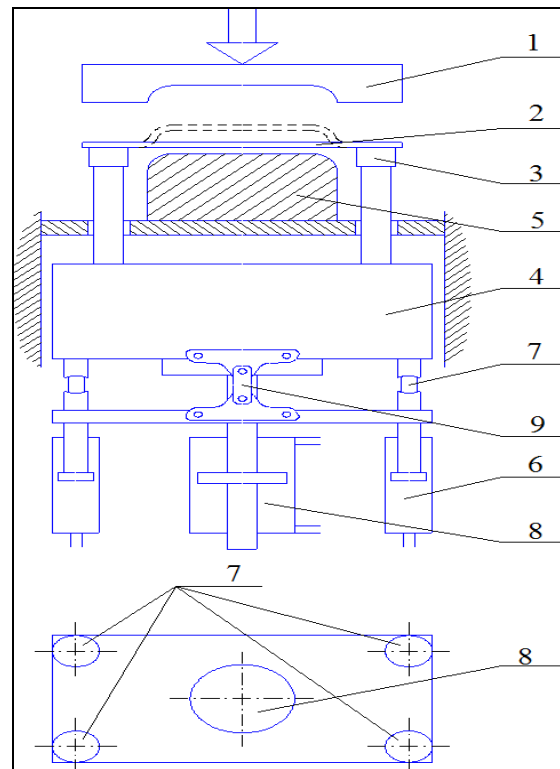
1- Sliding bar; 2 - Billet sheet; 3 – Supports; 4 – Bottom plate; 5 – Counterpart; 6 – Extraction cylinders; 7 – End-thrust bearings; 8 – Central cylinder; 9 – rod.
